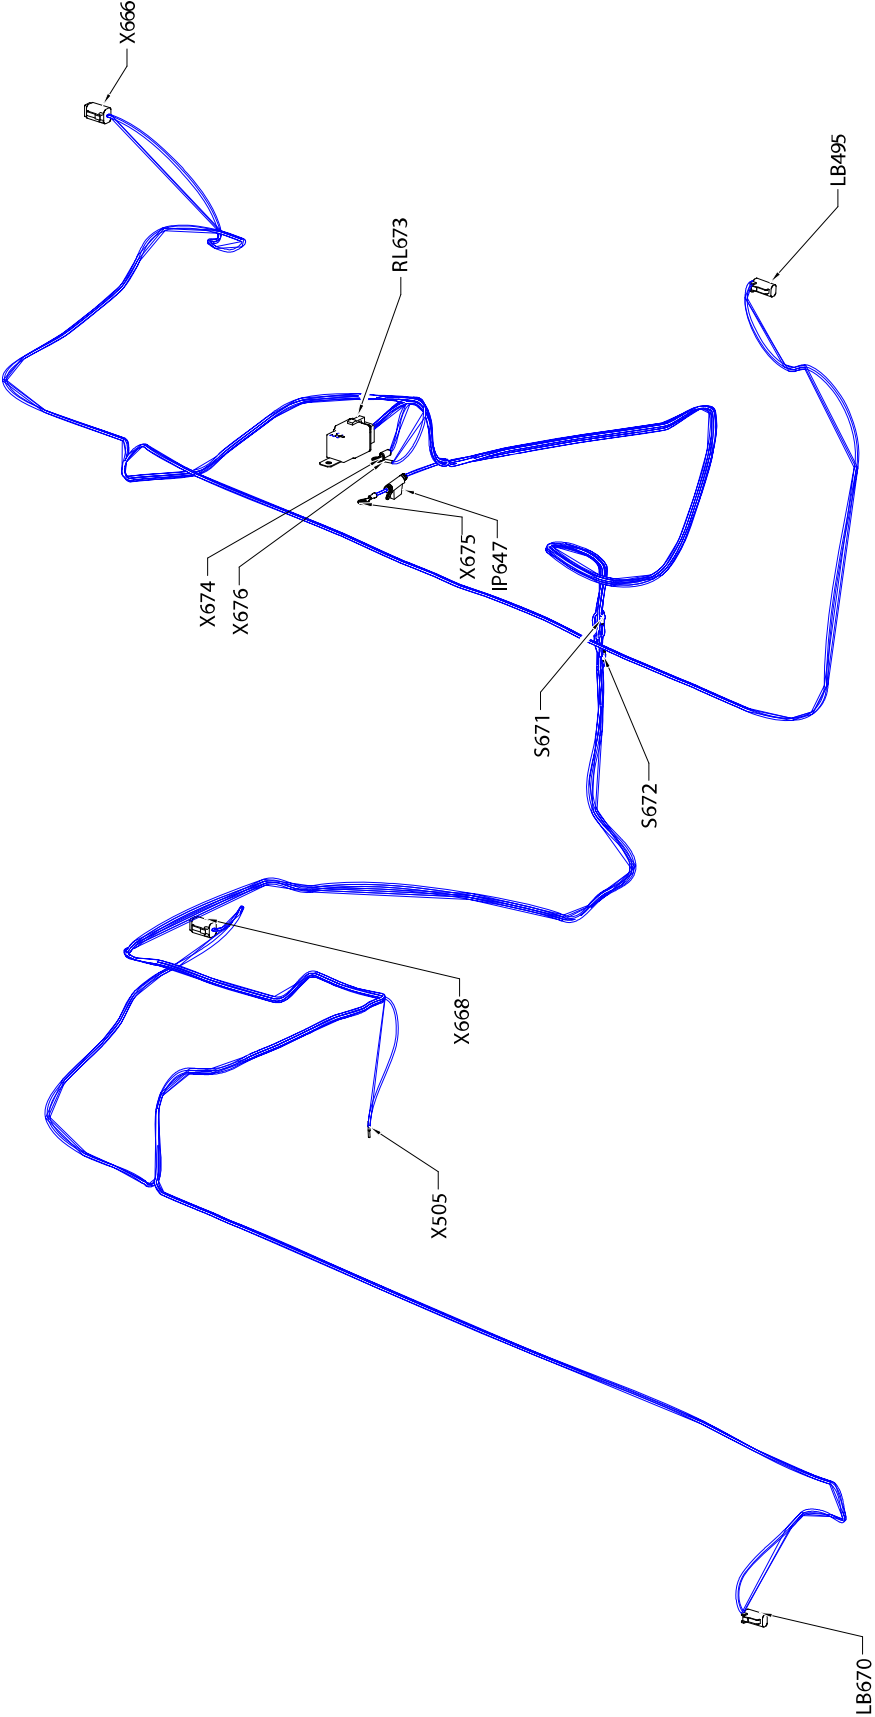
Chassis Head and Tail Lights Harness - Sheet 5 of 5
